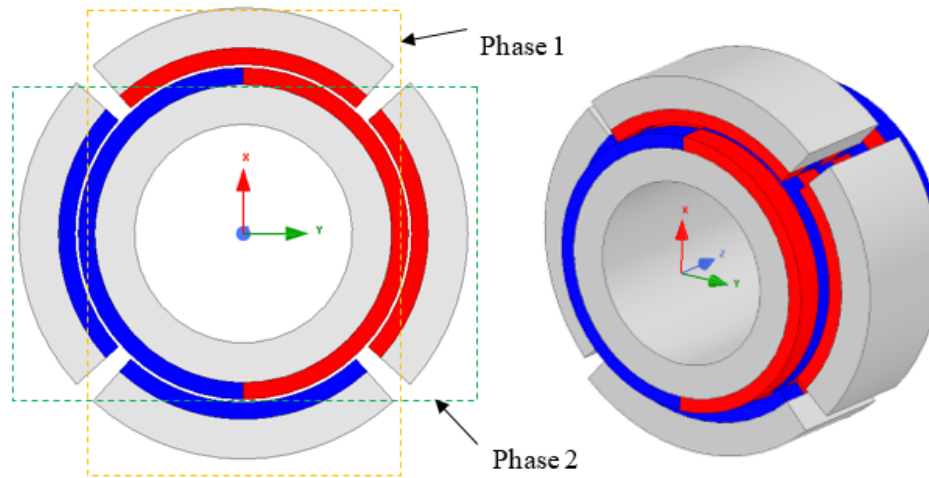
21. A magnetic gear topology without I-cores: a) front view and b) isometric view
